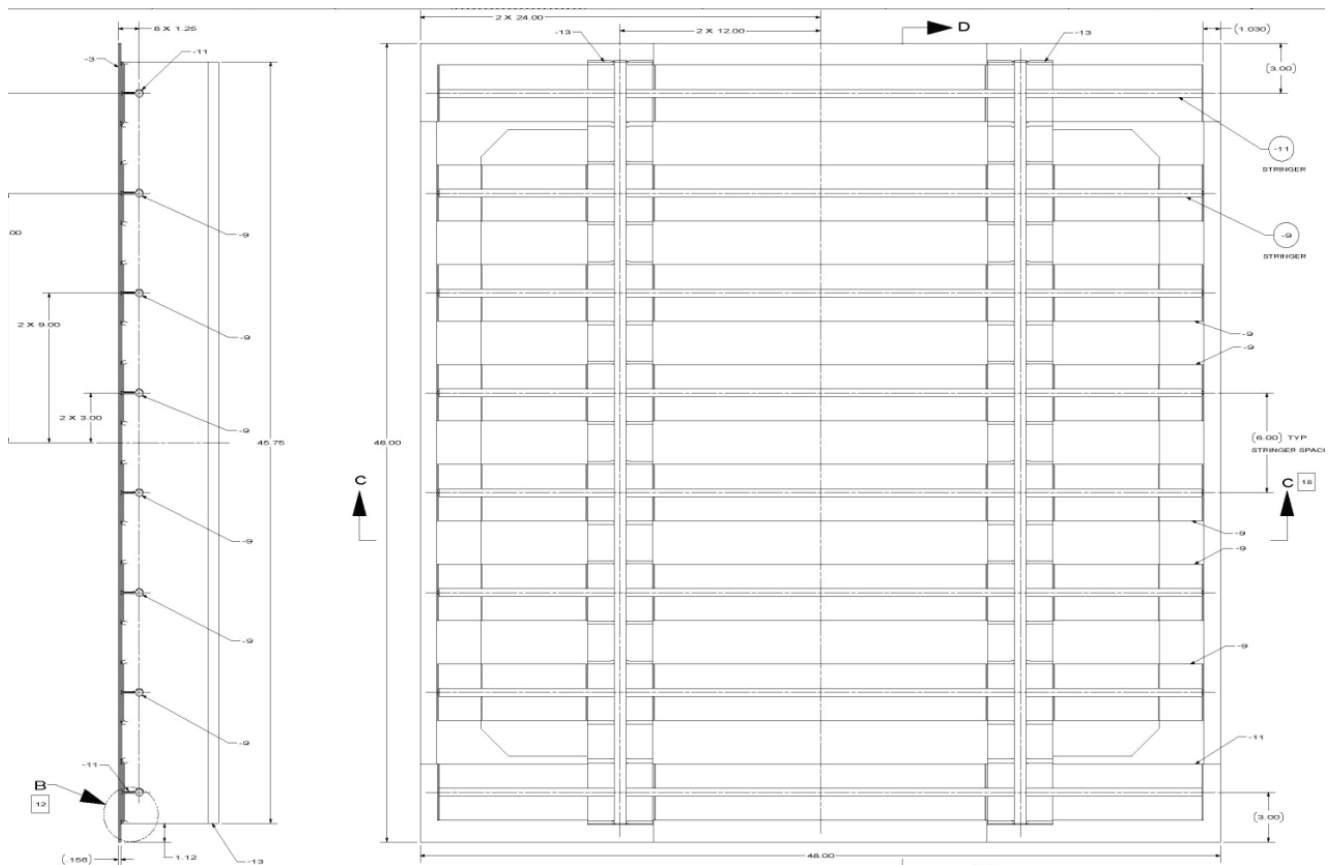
TEST PANEL STRINGER AND FRAME LAYOUT
